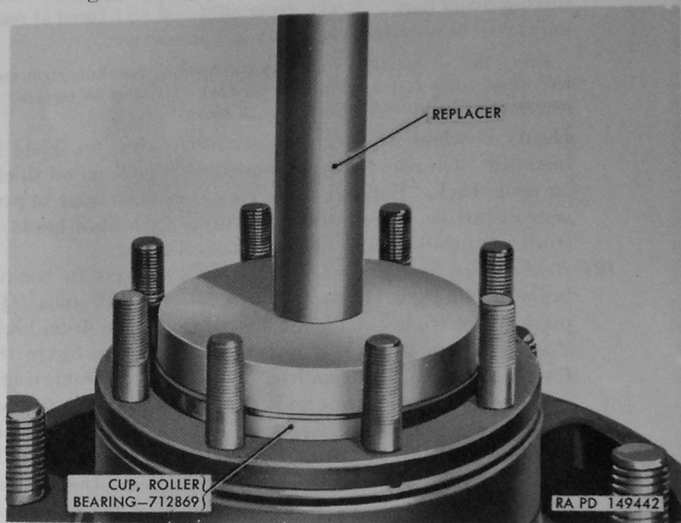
Installing bearing cups in hub with replacer 41-R-2292-635.
